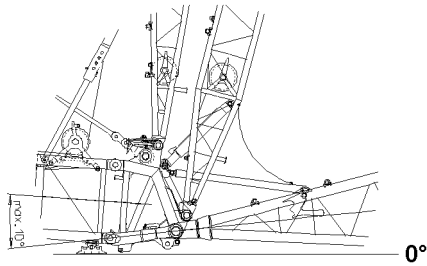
Disassembling the roller cart — Maximum angle between the main boom (S-/P-) and the W-pivot section
